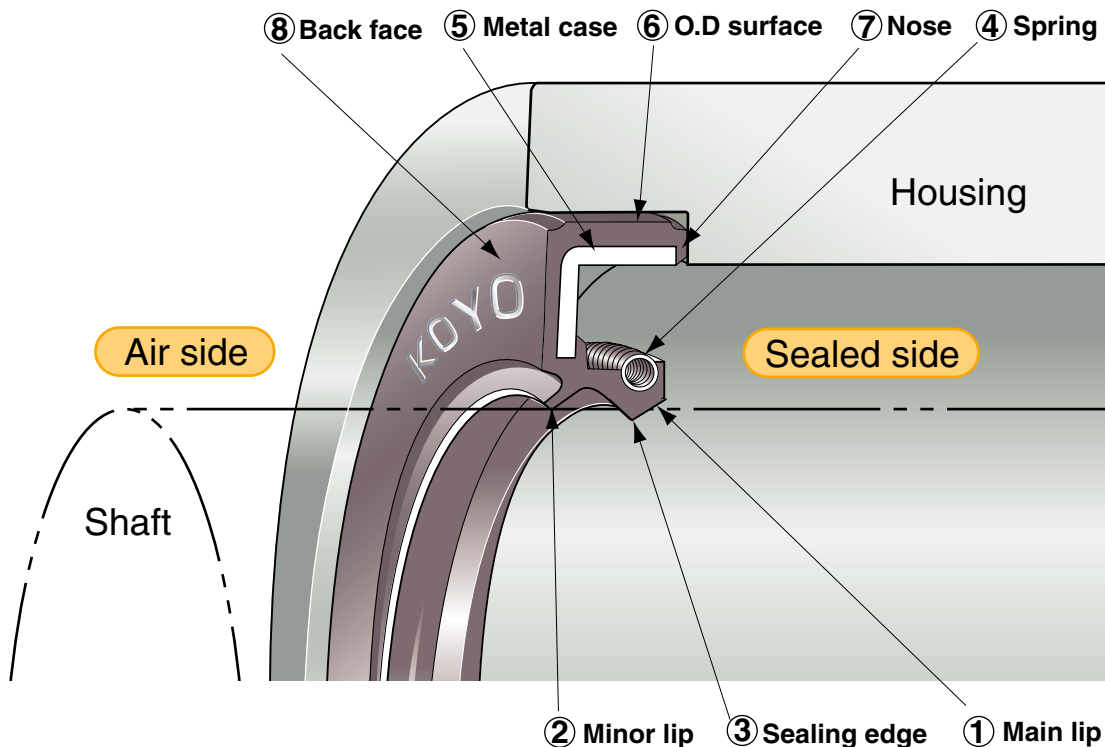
Typically shaped oil seal and component nomenclature
